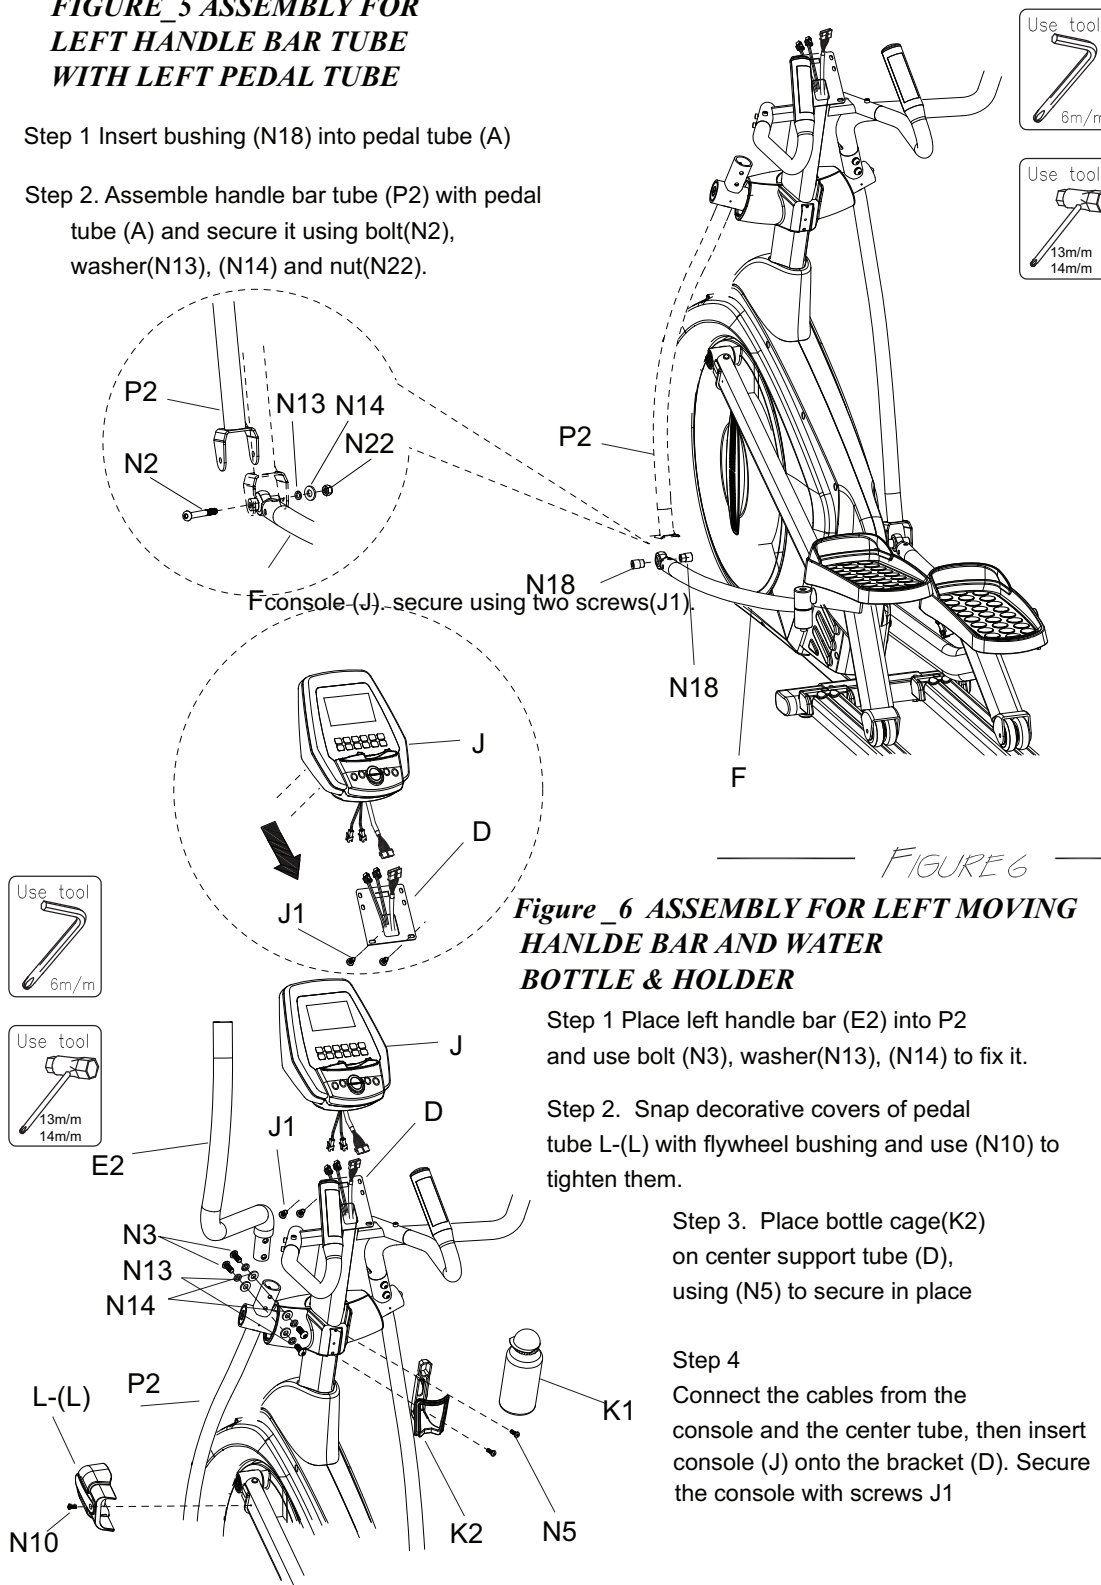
ASSEMBLY FOR LEFT MOVING HANDLE BAR AND WATER BOTTLE & HOLDER
